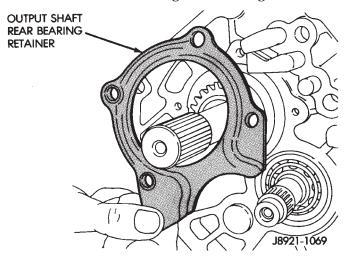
Remove Output Shaft Rear Bearing Retainer
